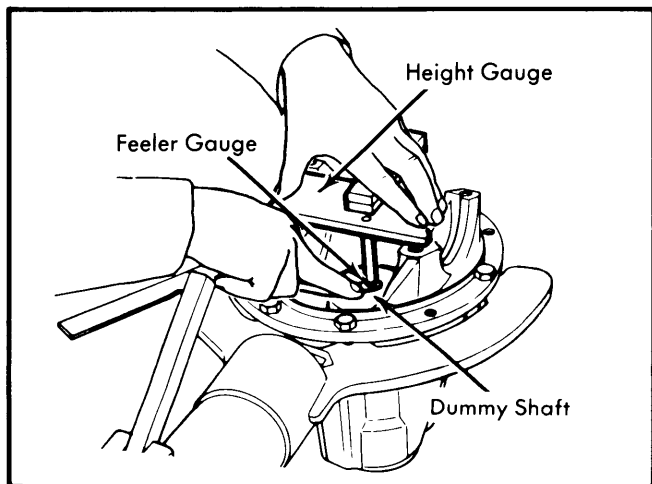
Measuring Clearance Between Height Gauge and Dummy Shaft
